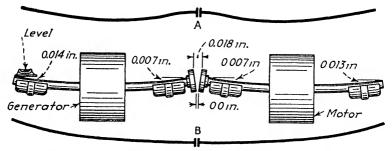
Eliminate bend at couplings by forming a uniform bend in shaft.
